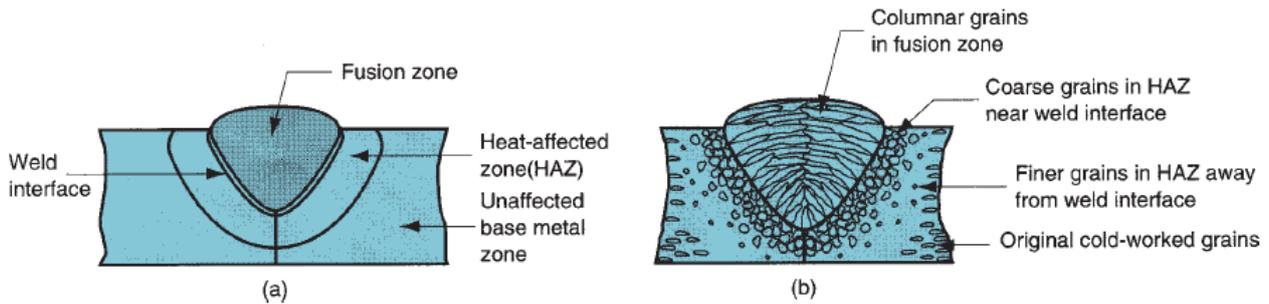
Cross section of typical welded joint: (a) principal zones of the welding and (b) respective grain structure [4]
